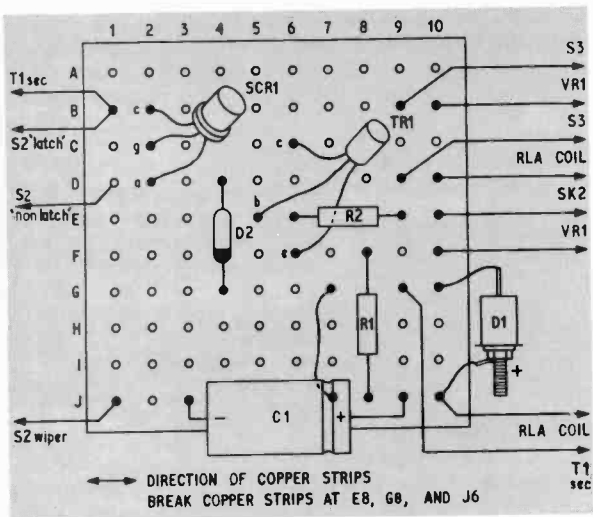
Component and wiring layout of Veroboard sub-assembly
